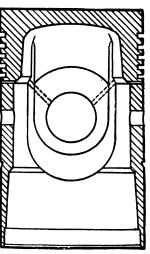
Long-Skirt Diesel Truck Engine Piston.
